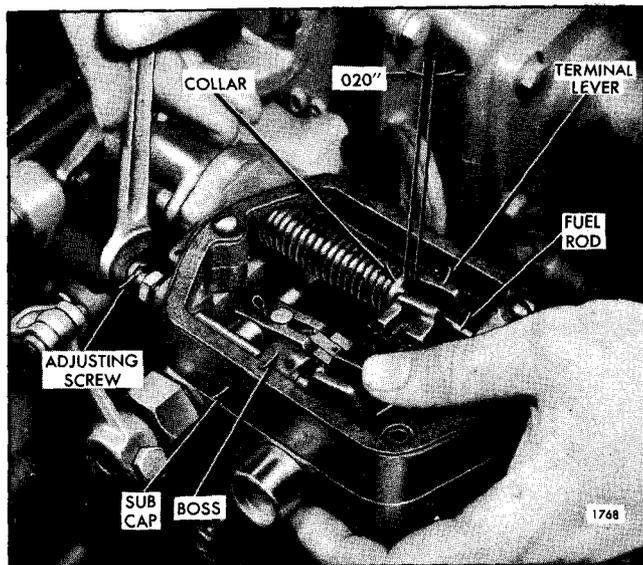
Setting Maximum Fuel Adjusting Screw (Load Limit)
